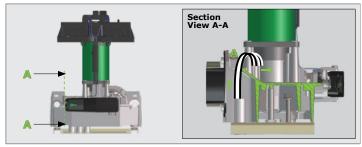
CABLE ROUTING FOR NEW INSTALLATIONS
